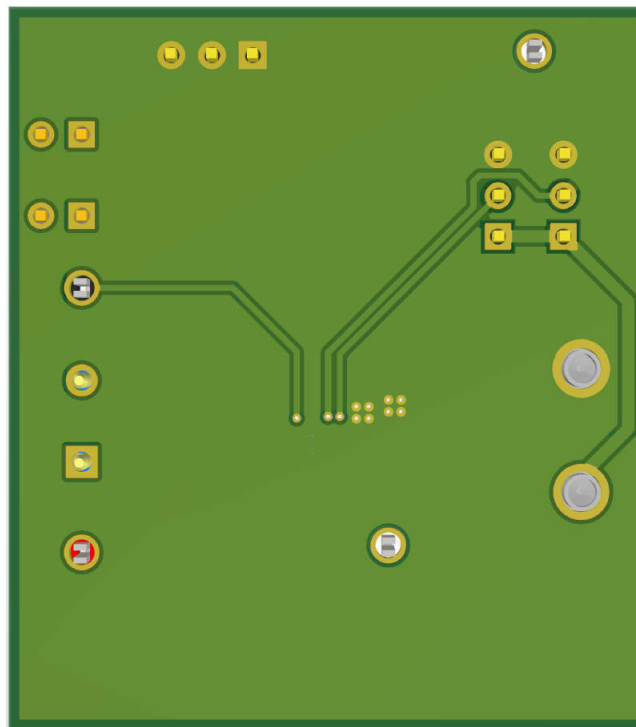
Bottom Layer and Bottom Overlay (Bottom View)
